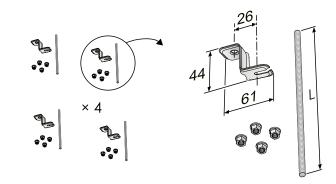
Assembly fitting SYST MS M8-1, ceiling mount and threaded rod
